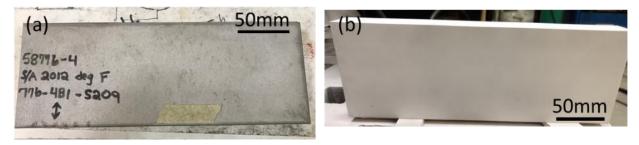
(a) As-received Alloy 709 AOD SA1100 plate, (b) after surface grinding with dye penetrant coating to show surface cracks/defects removed.
